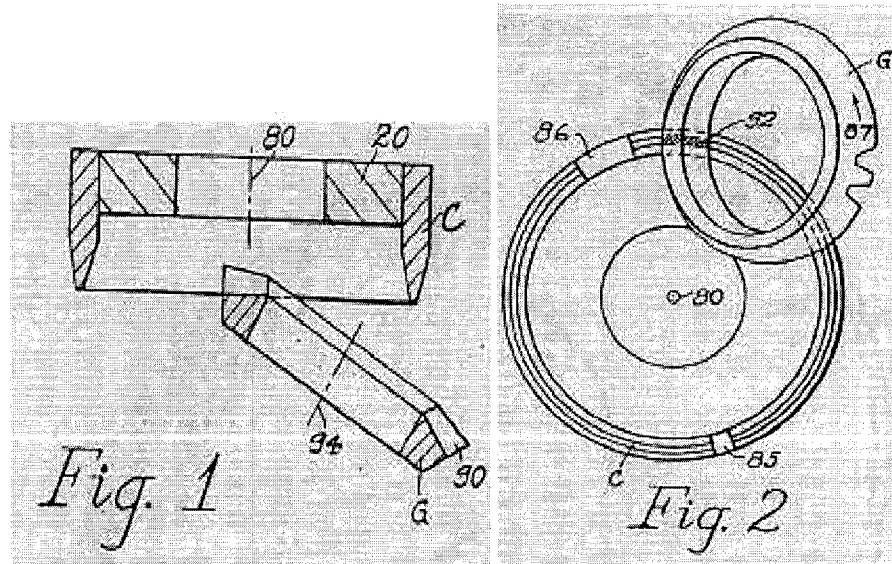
Gear generation with face-mill gear cutter [Carlsen, 1942]
